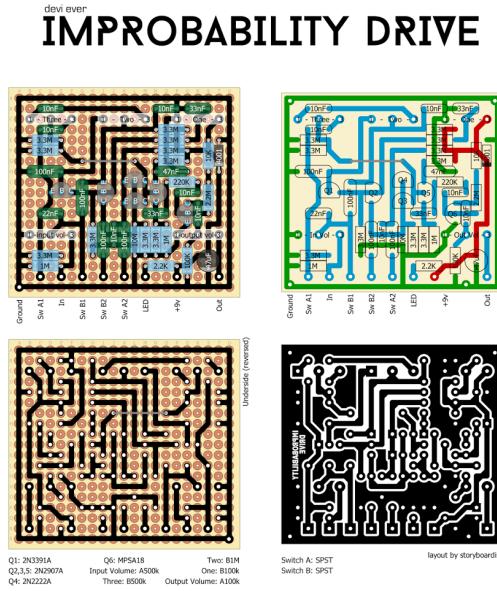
The Improbability Drive circuit layouts for PCB or prototype board, courtesy of storyboardist
